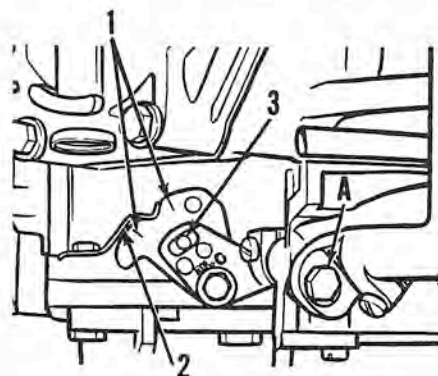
Shift lever should be adjusted so that detent spring rests in notch as shown, in neutral position. Clutch dogs should just start to engage gears when detent is aligned with either of the scribe lines (1). Detent is adjusted by loosening the nut on stud (3). Adjusting cap screw (A) properly positions the external lever as shown in Fig. J114.
